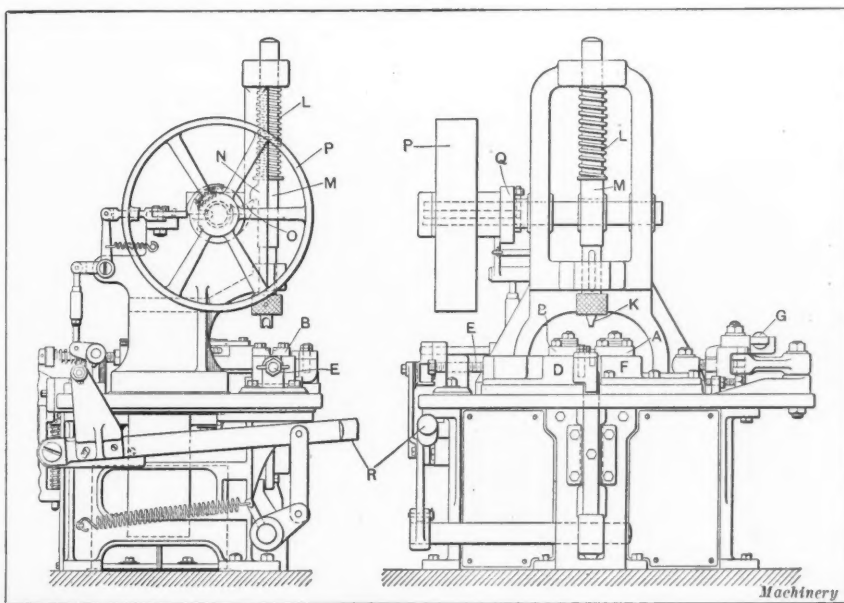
Chain-welding Machine designed and built by the Thomson Electric Welding Co.
